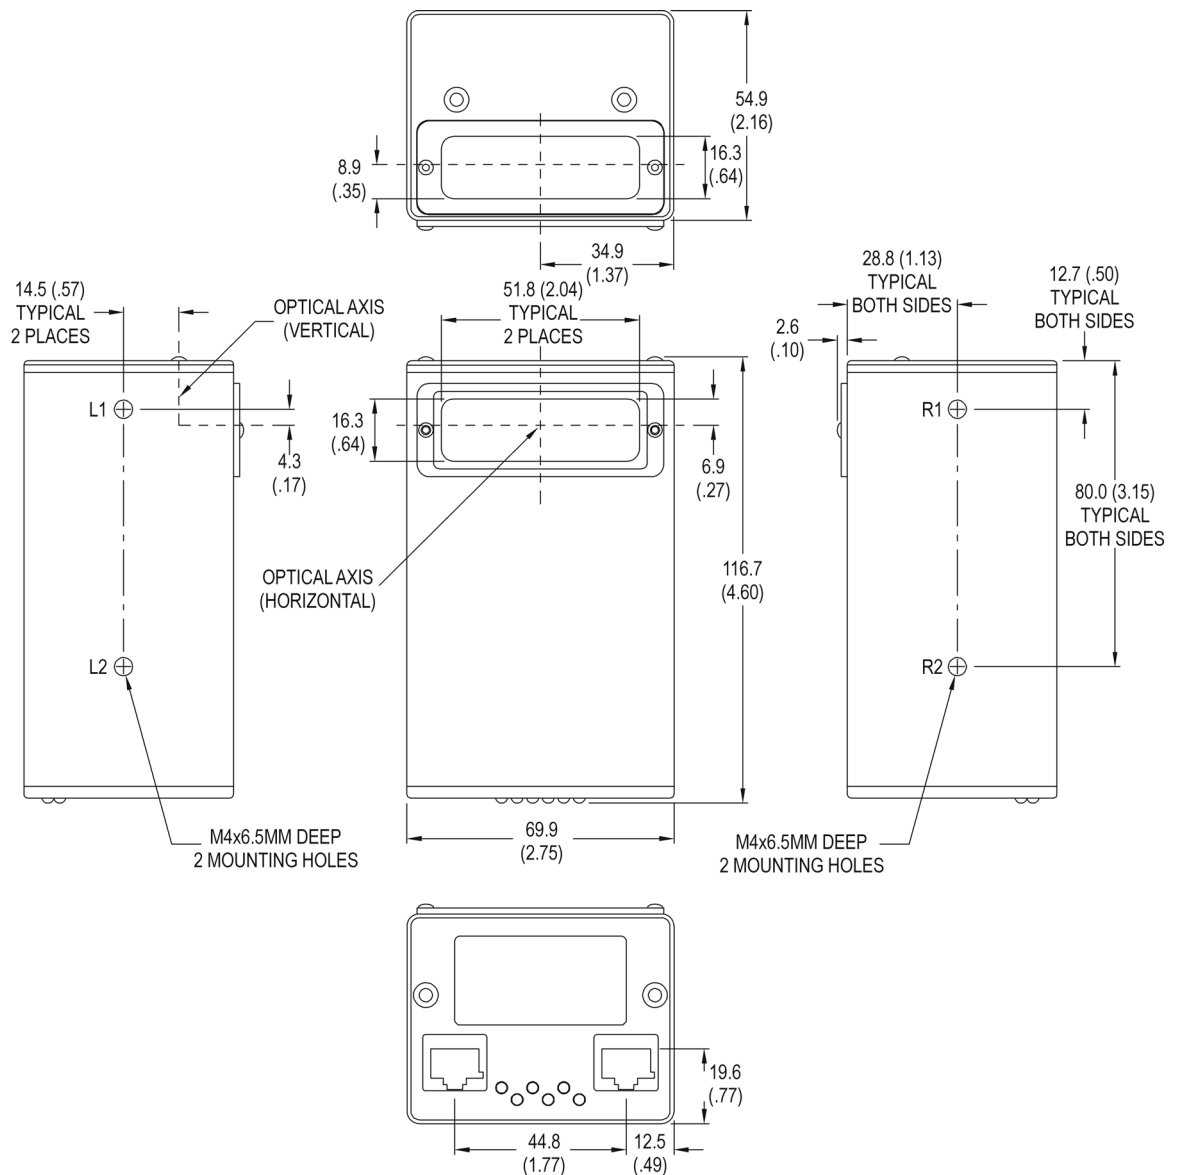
In-Sight 1700 Wafer Reader Dimensions
